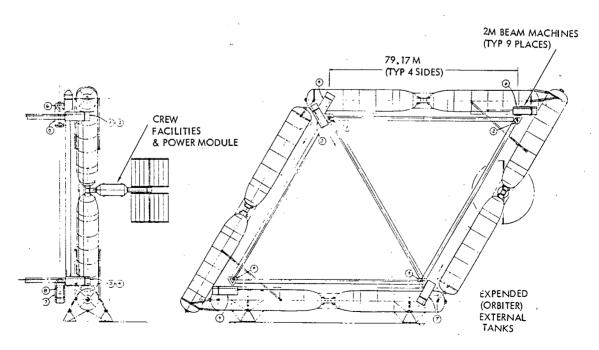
Mobile 79m Girder Fabrication Facility (Right-Hand Shown)
